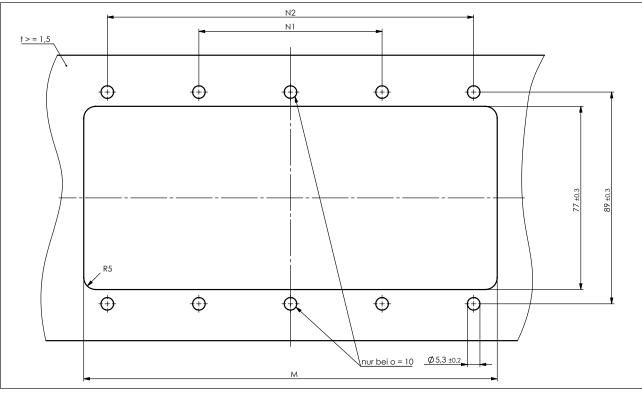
Flange fitting AirLINE Quick – for dimensions see Table 2
